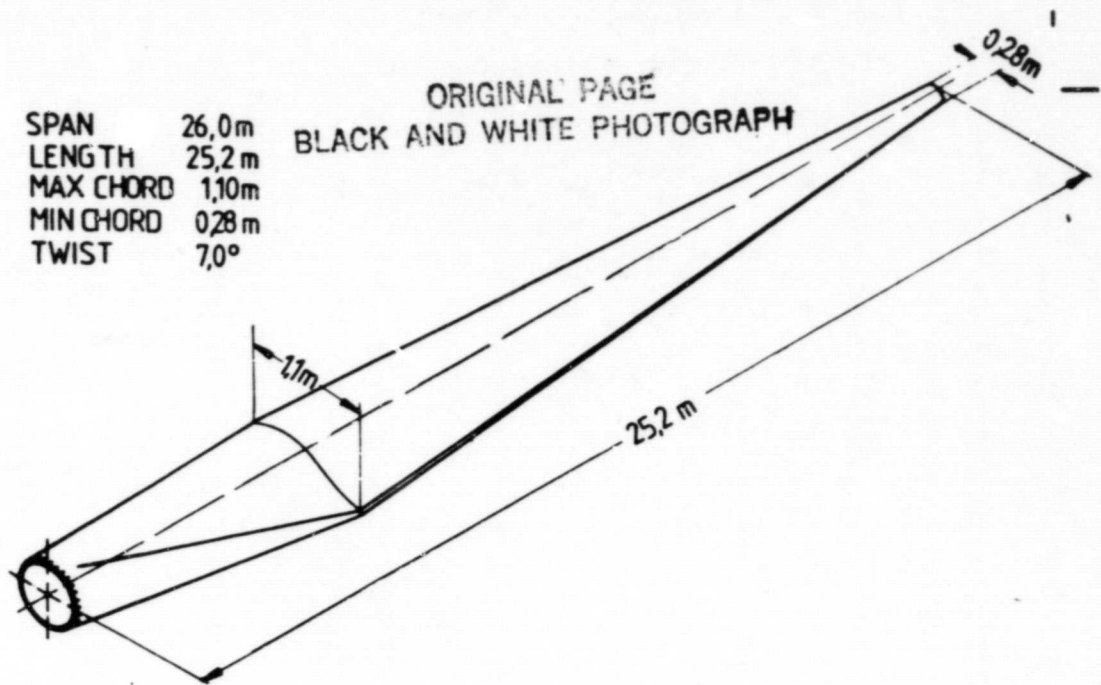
DIMENSIONS OF ROTOR BLADE
